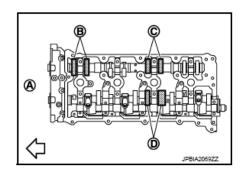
Locating Valve Clearances Measurement Locations Courtesy of NISSAN NORTH AMERICA, INC.
